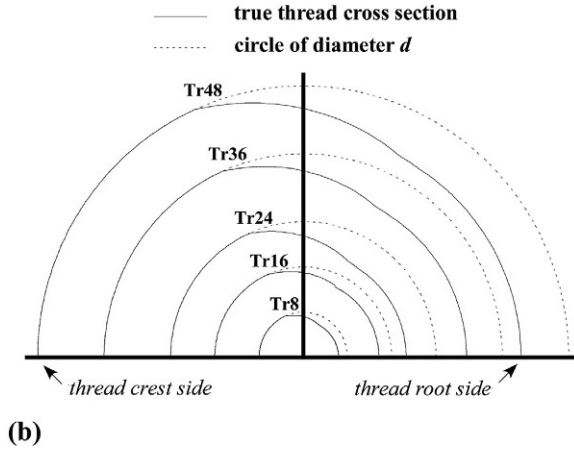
True cross-section geometry of male threads of triple-thread screw and trapezoidal screw threads.
